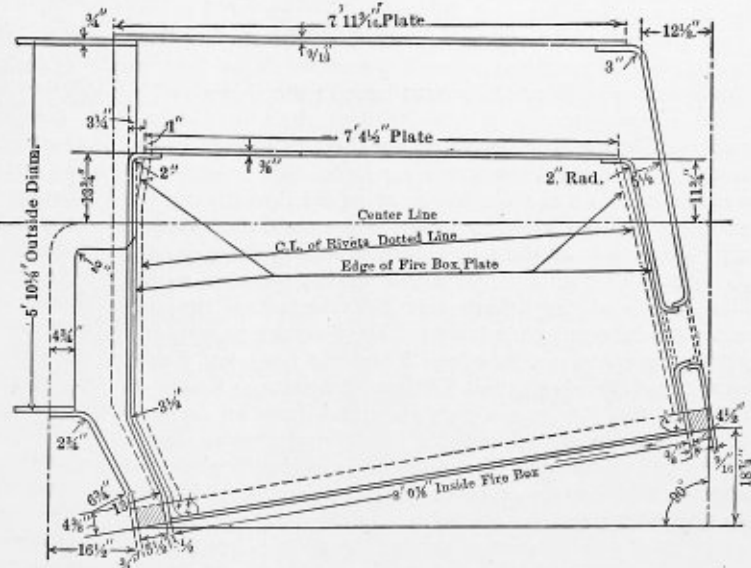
Longitudinal Section Firebox Wrapper Sheet
